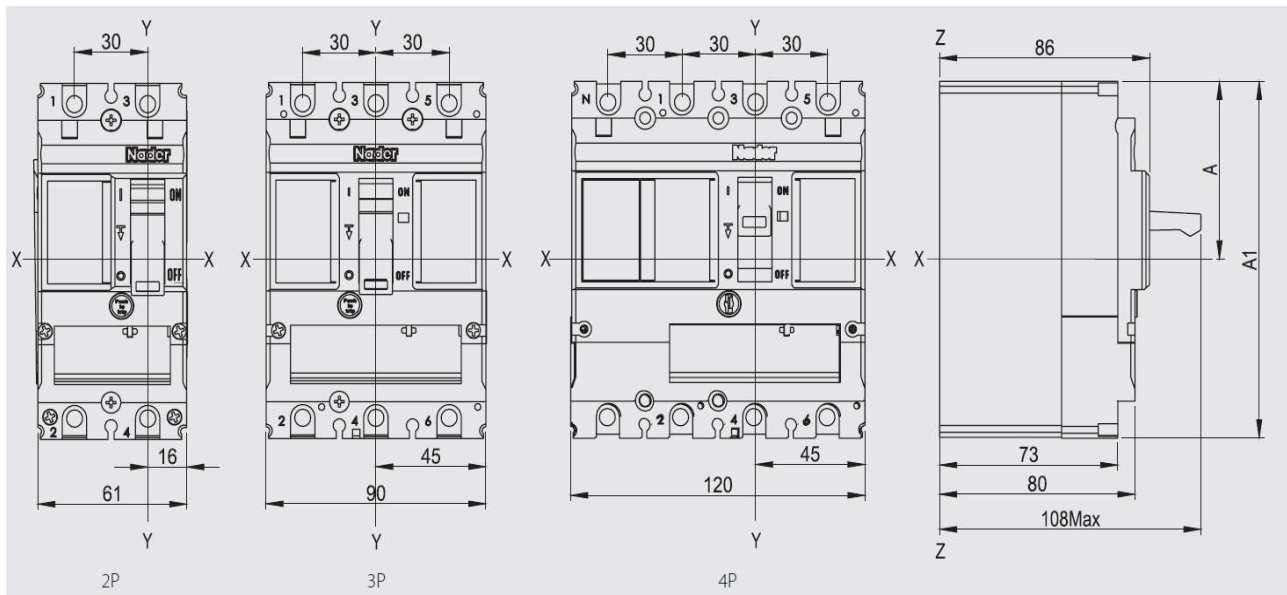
2P 3P 4P Outline dimension drawing of front board wiring products
